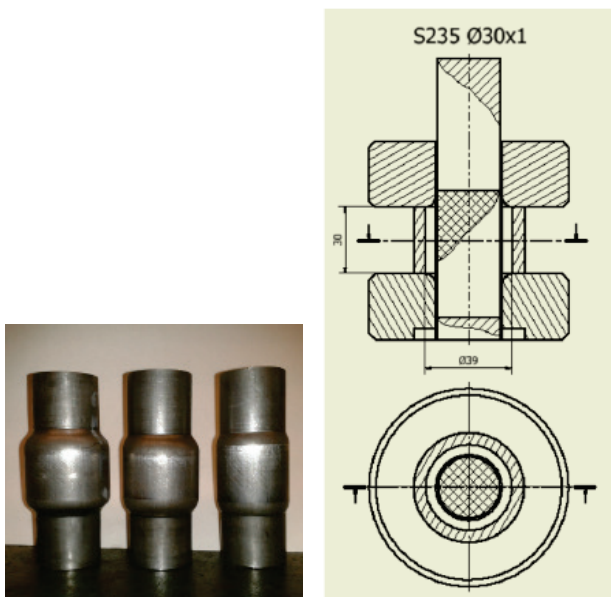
Ø33, Ø36, Ø39 expanded tubes and the forming tool.
